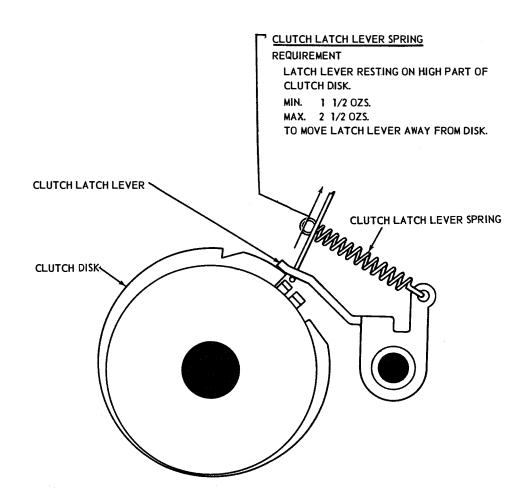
KEYBOARD, CLUTCH MECHANISM
